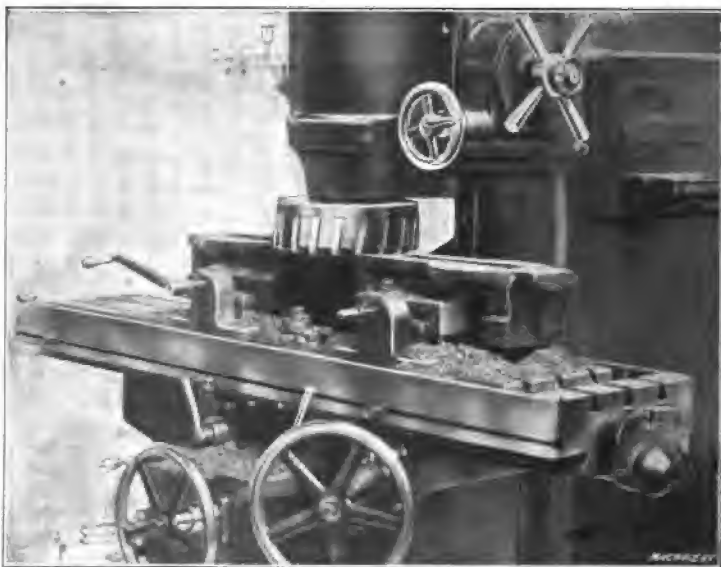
Machine equipped with Two Work-holding Fixtures so that One Casting can be chucked while the Other is being Milled
